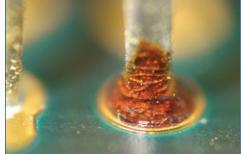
Connector pin soldered with SnAg using soldering iron.
